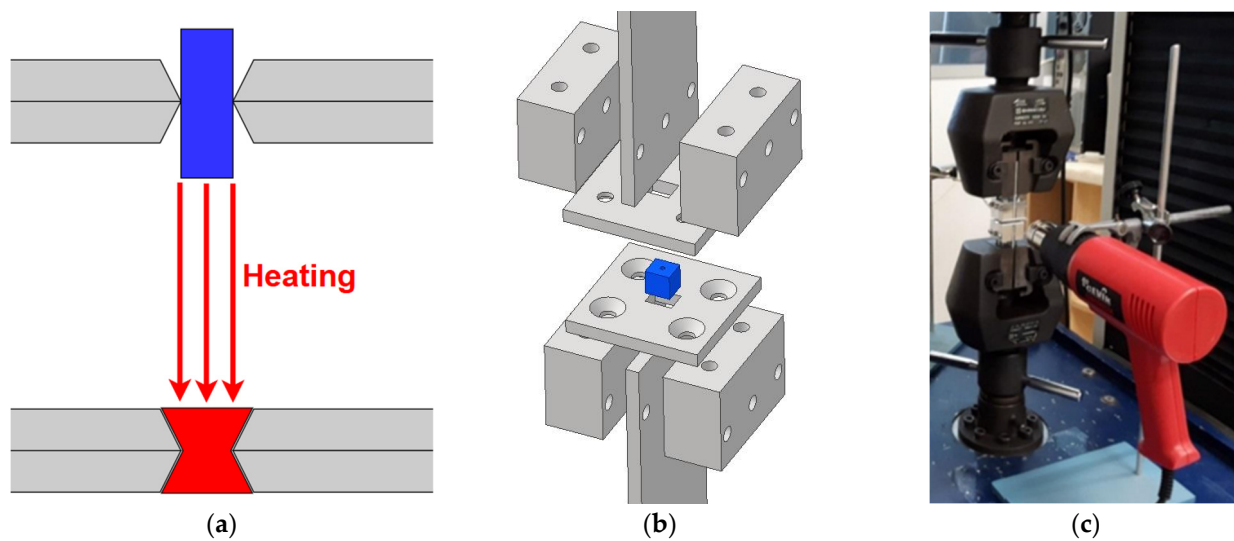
Proof of concept scheme—(a) SME concept rivet; (b) exploded view drawing of the prototype; and (c) test assembly method.
